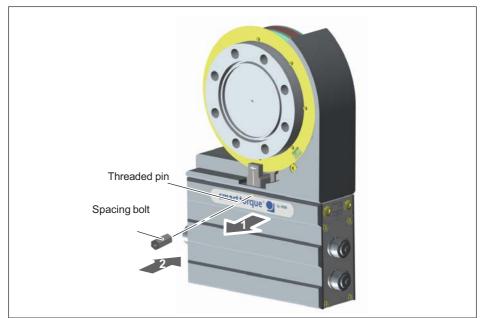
Fitting the spacing bolt (for 5 kN·m and 10 kN·m only)
